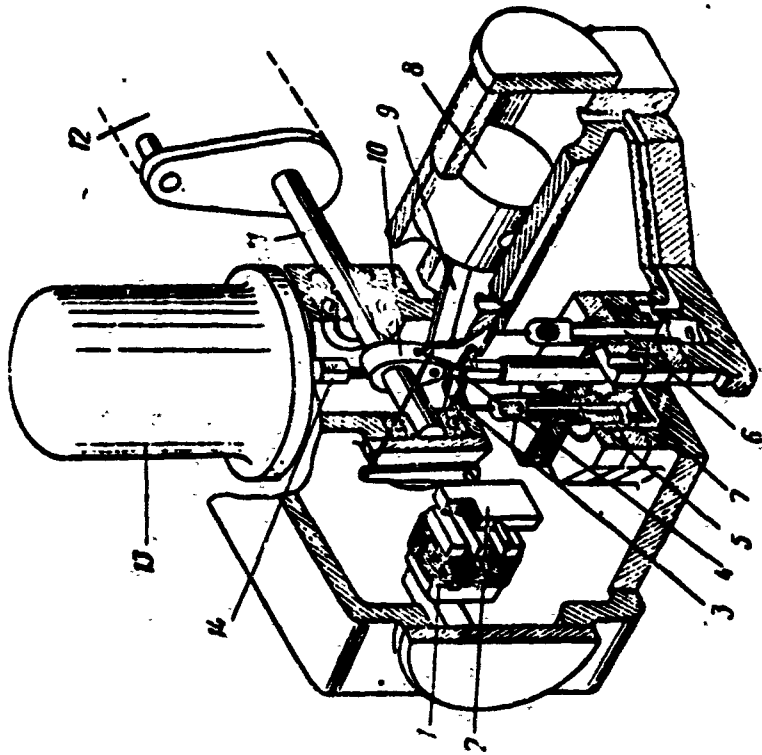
Structure of steering machine. 1 - polarized relay; 2 - balance beam; 3 - valve distribution; 4 - laminar spring; 5, 6 - piston of valve device; 7 - gear pump; 8 - operating piston; 9 - connecting rod; 10 - crank; 11 - shaft of steering rudder; 12 - steering rudder; 13 - motor of gear pump; 14 - shaft of motor.
